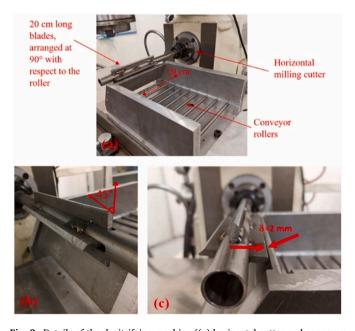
Details of the devitrifying machine ((a) horizontal cutter and conveyor rollers, (b) blade profile: 45°, and (c) distance between the roller blades and the inclined stator: 2 mm [31].
